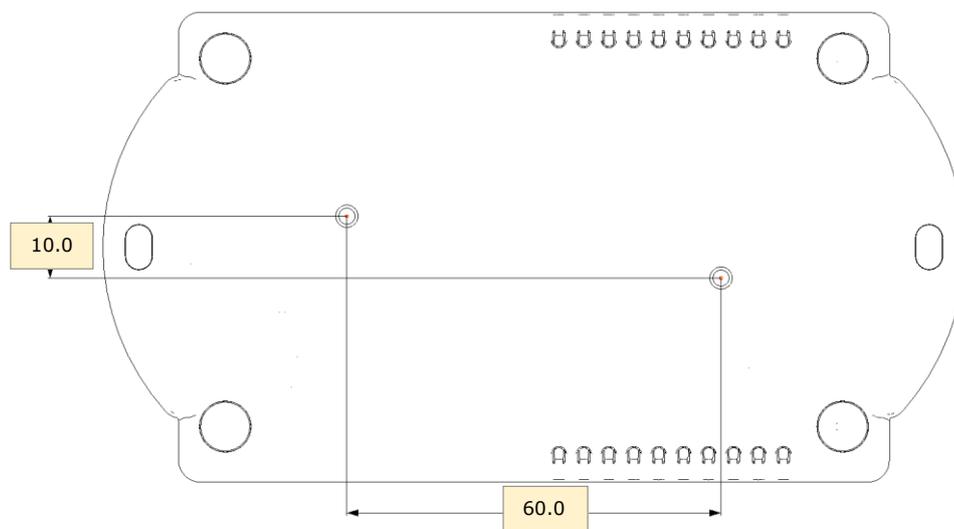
LDSBus Isolated IO Controller Dimension – Bottom View
